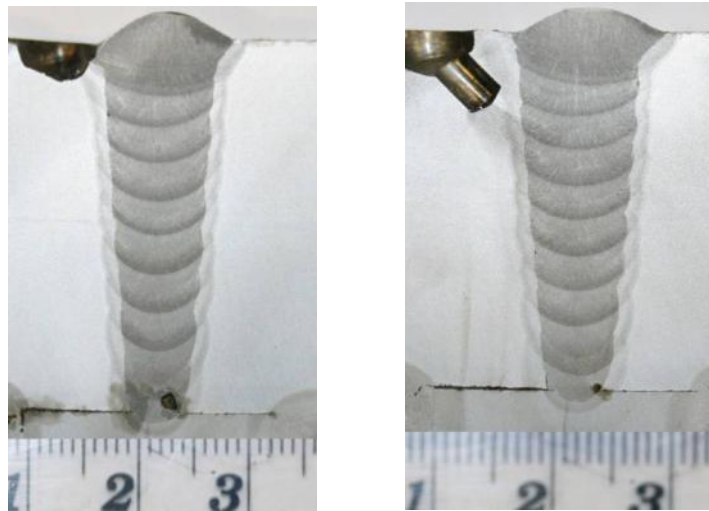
Macrographs of tandem MIG X70 weld 1
